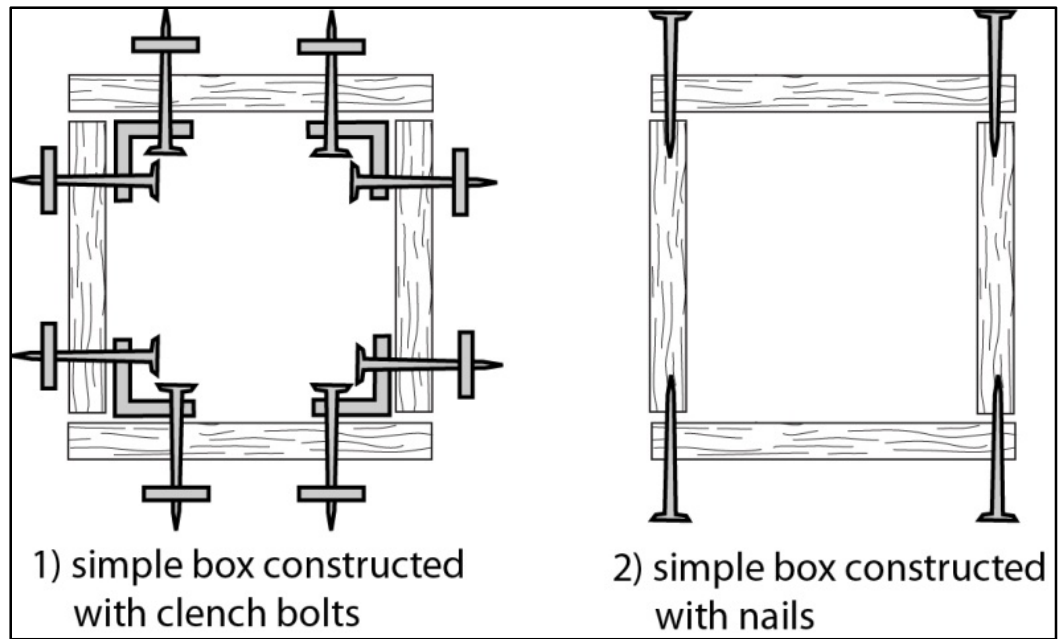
Schematic drawings of box construction using clench bolts and nails.
